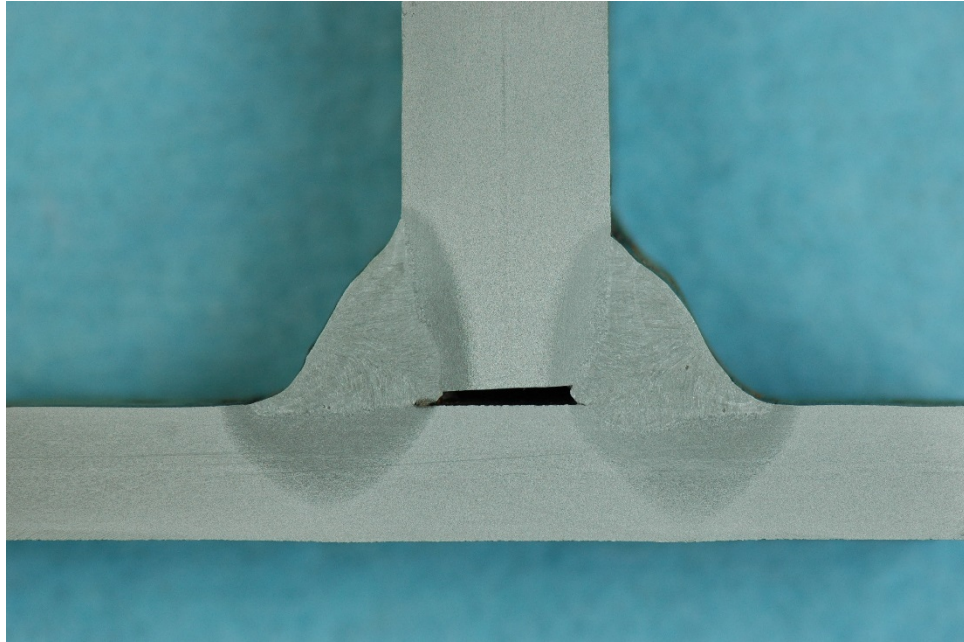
A typical macro-etched section of rib-to-floor beam weld in MU2
